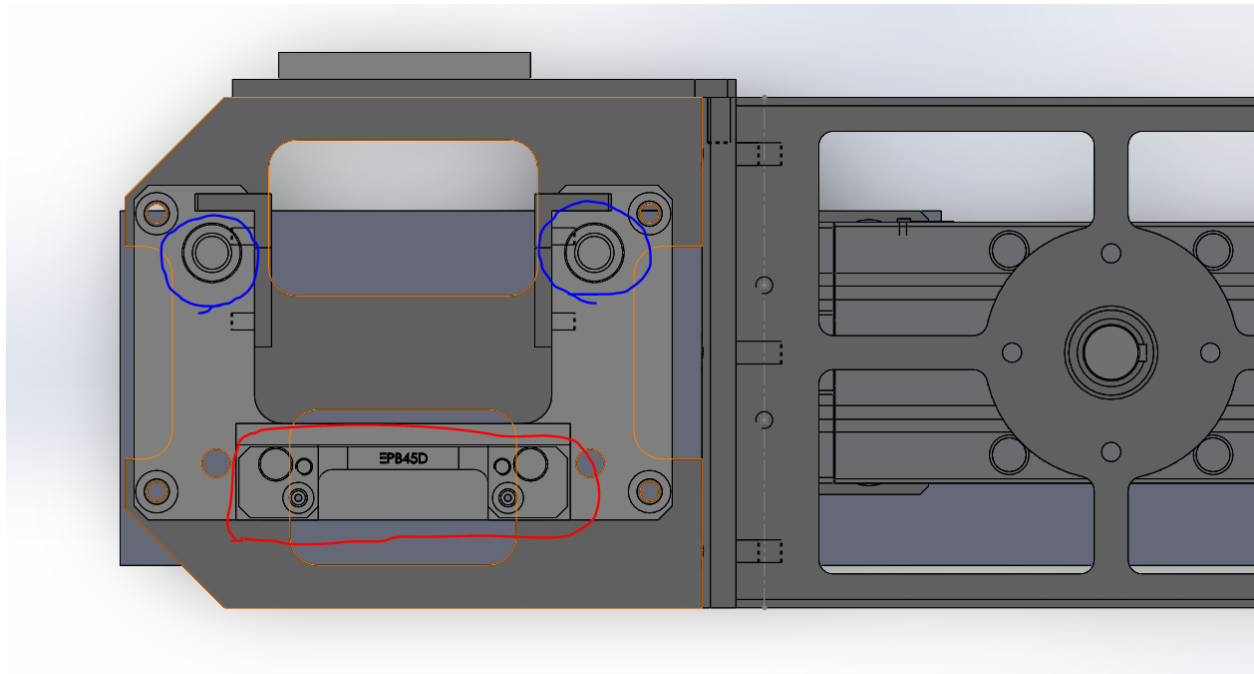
Top View of Left-Hand Side Of Fixturing, Fixed Datum Pins Are Circled In Blue, Change Over Fixturing Plate Circled In Red
